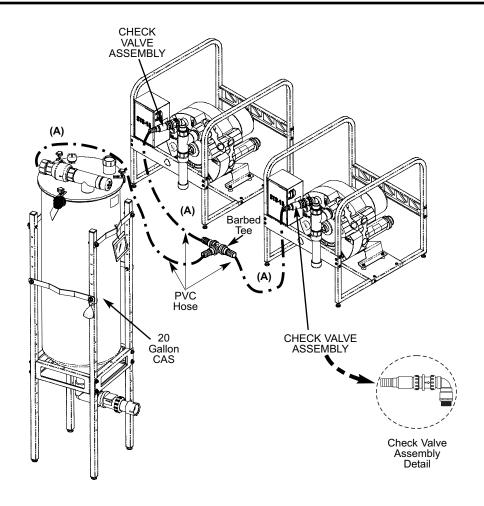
Pump Combining Using Dual SystemAccessory Kit, P/N 54400
